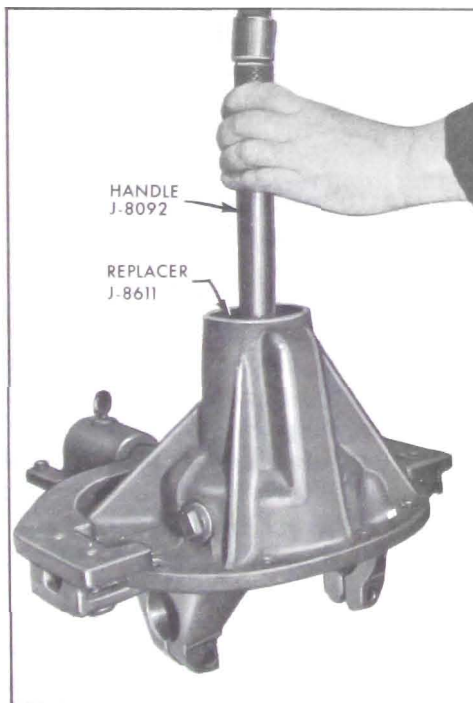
Installing Front Pinion Bearing Outer Race
